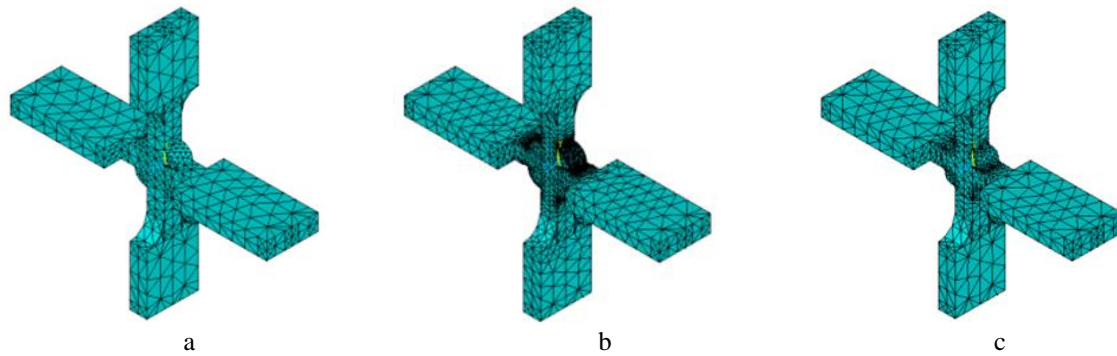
The tridimensional models of the specimens drawn in a computer assisted design program. (a) specimens B2, B3 and B4 without rehabilitation, (b) specimens B5, B6 and B7 with “grinding weld toe”, (c) specimens B8, B9 and B10 with “WIG remelting weld toe”.
